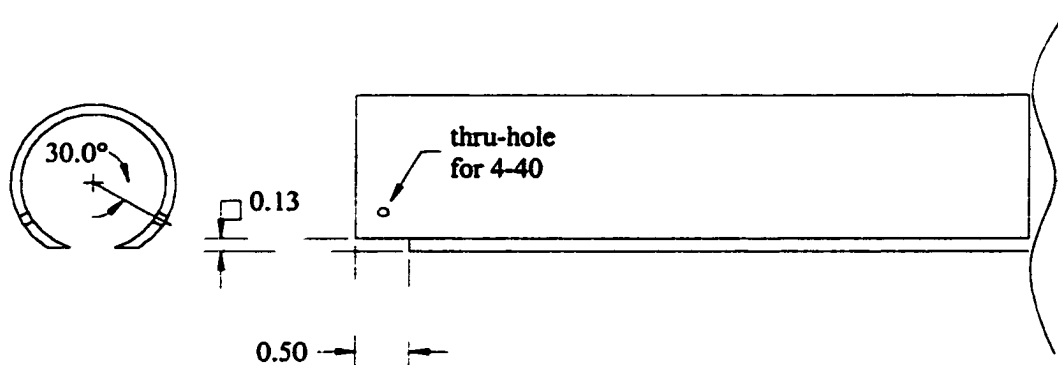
Design drawing for the sample holder end of the manipulator support tube.
